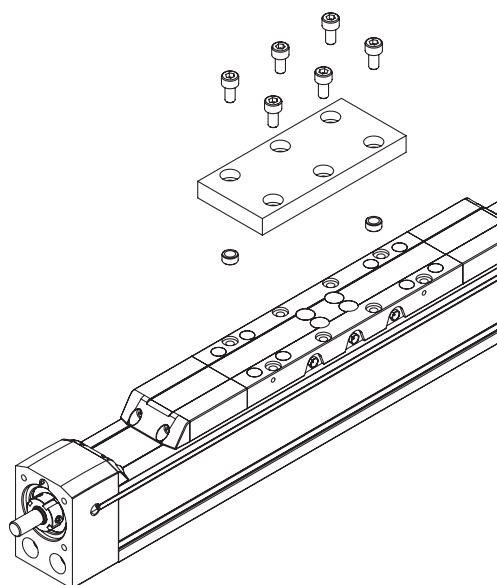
Securing the load with centring sleeves (linear module HM-S as an example)
